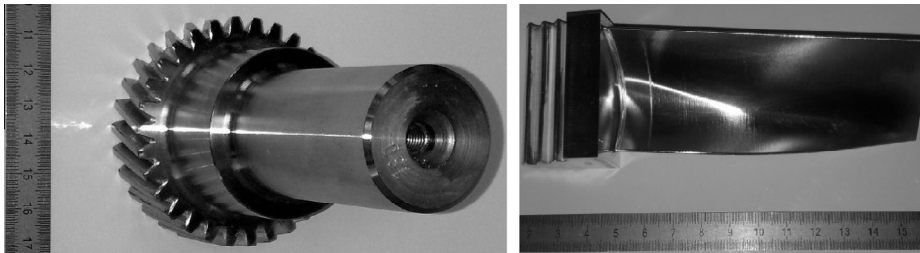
Objects for experiments: pinion shaft (left), compressor blade (right) with a centimeter ruler.
